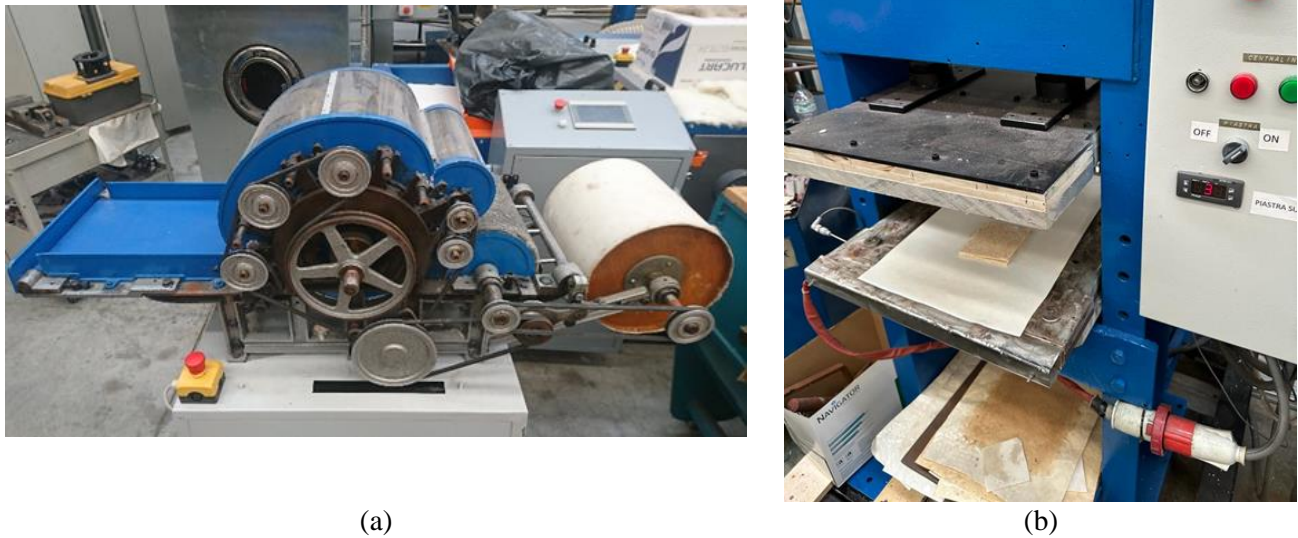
Machinery used during the fabrication process of the recycled wood: cardina (a), thermos-presser (b).
